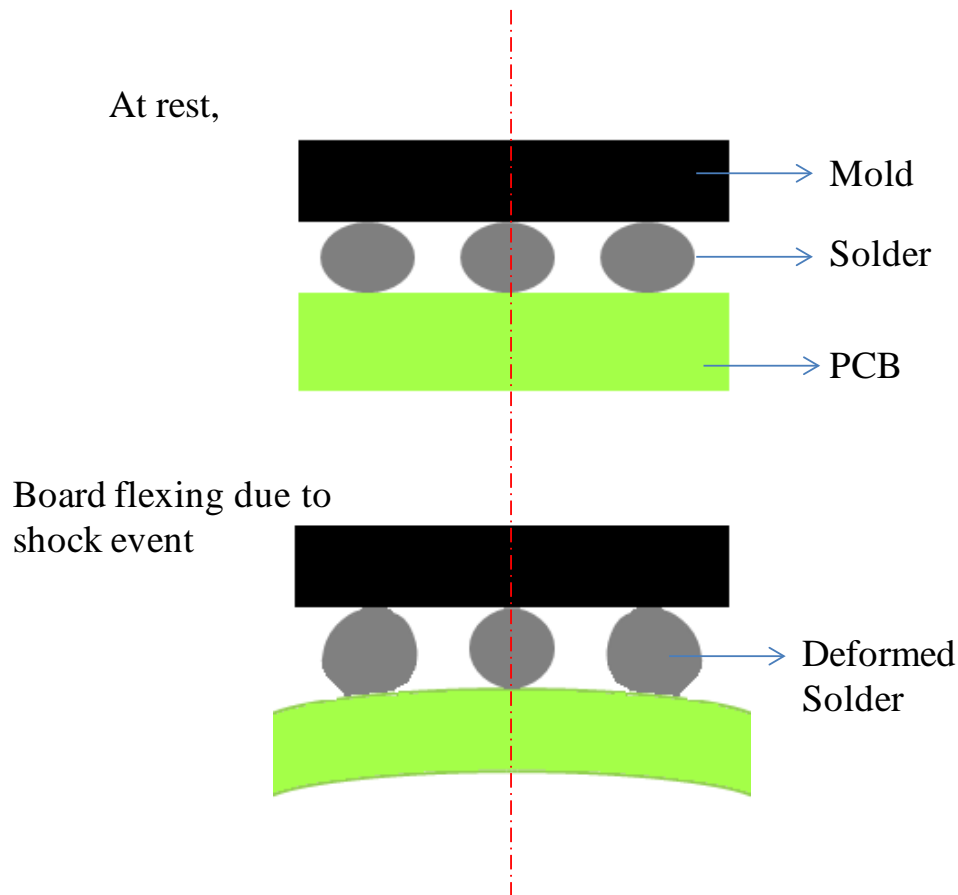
Typical PCB assembly deformation under shock and vibration load with normal stress component (solder interconnect axis) being dominant for deformed solder
